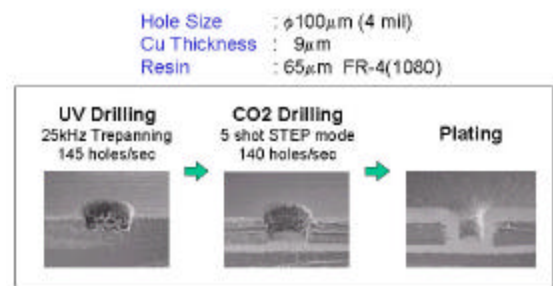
Test Result, UV+CO₂ Laser Drilling
